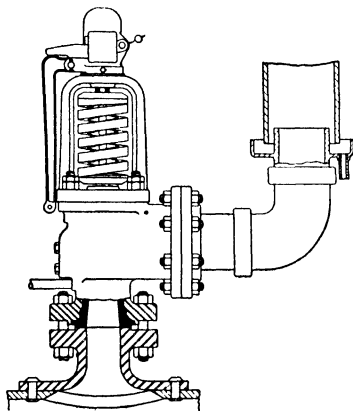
Recommended safety-valve installation. Note slip joint in discharge piping to relieve valve of pipe strain.
